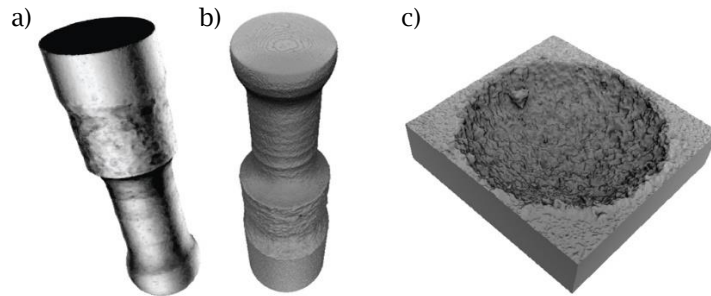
3-D mesh of the experimental tool: a) before and b) after machining, c) workpiece after machining.
